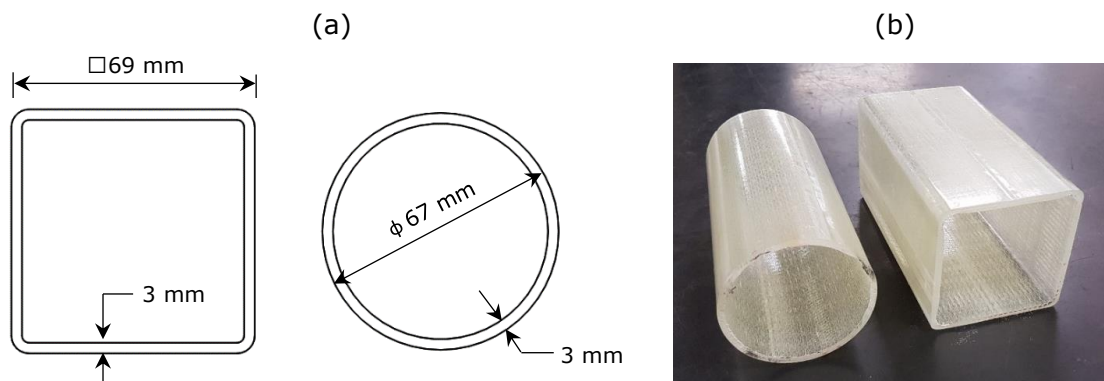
Fabricated CHS and SHS components; (a) cross sectional dimensions and (b) 60 mm long components tested for SME
